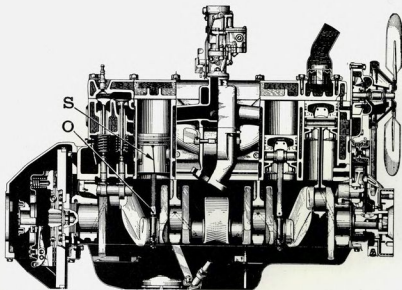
Side Section of 1900 Engine and Clutch Assembly. Holes "O" and Slots "S" Should Face Camshaft
